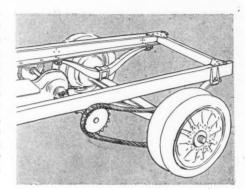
SHOWING DOUBLE-CHAIN DRIVE
